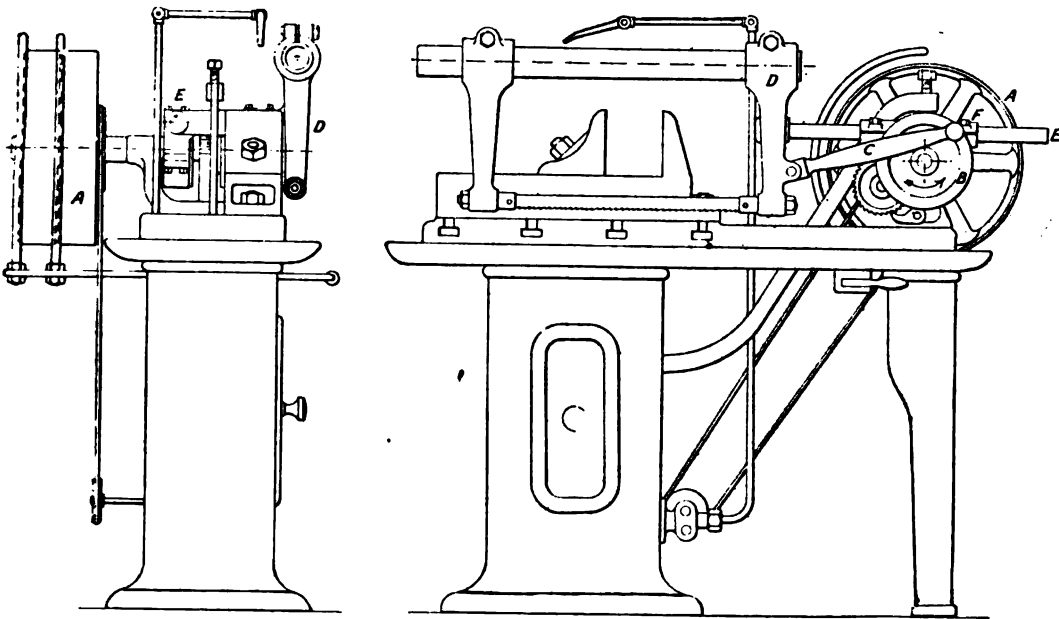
Hack-Saw Machine. End and Side Elevations. (E. G. Herbert, Ltd.)
